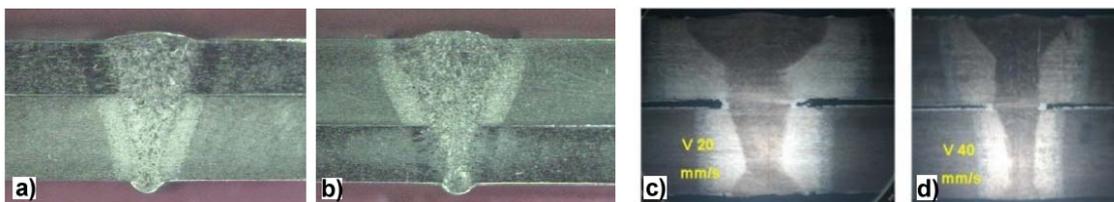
RLW joints welded with 3.5 kW CO<sub>2</sub> laser at CLUPM: a) 1.6 mm ST05 Z ST05 + 2.5 mm ZStE 260 Z; b) 2.5 mm ZStE 260 Z + 1.6 mm ST 05 Z; c), d) overlap joints of 1.6 mm sheets of USIBOR 1500 coated with ALUSI; defect-free welds achieved at two welding speeds (c)-20 and (d)-40 mm/s, in keyhole mode welding.
